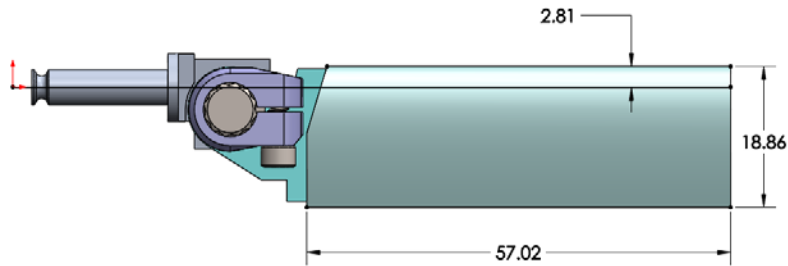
Canard assembly showing location of pivot line relative to canard blade; dimensions in millimeters
